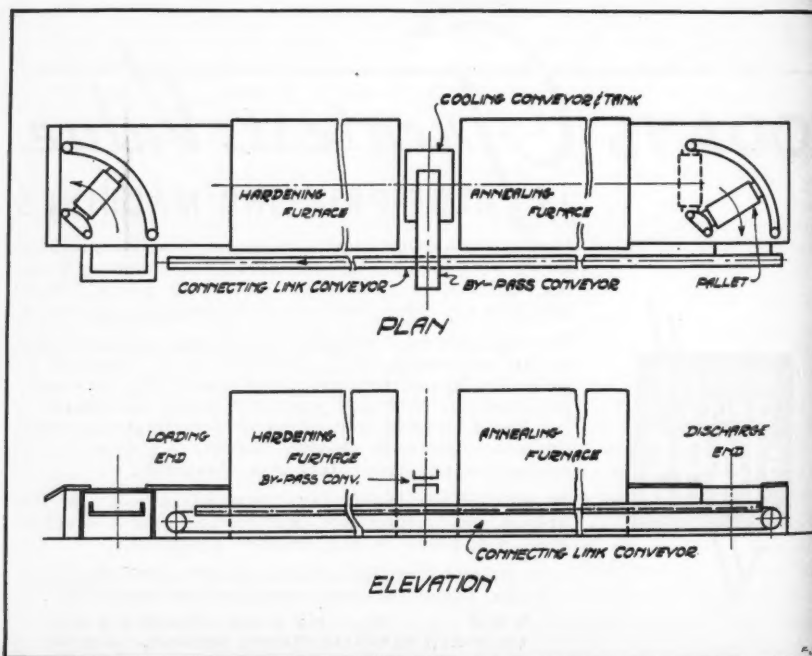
Diagram showing arrangement of conveyors for handling forgings continuously.
